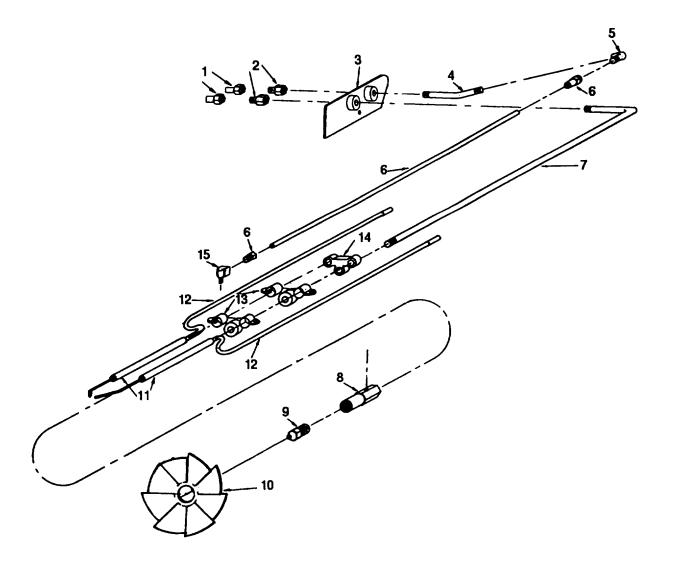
ELECTRODE ADJUSTMENT AND DETAIL ASSEMBLY.
